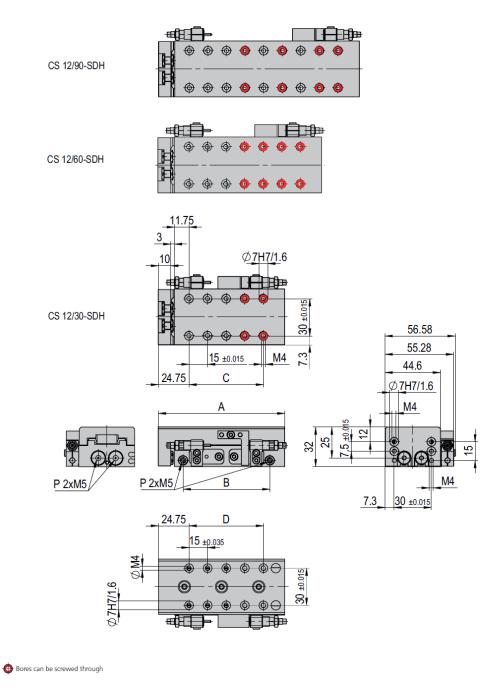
Dimensional drawing Compact Slide CS 12 SDH
